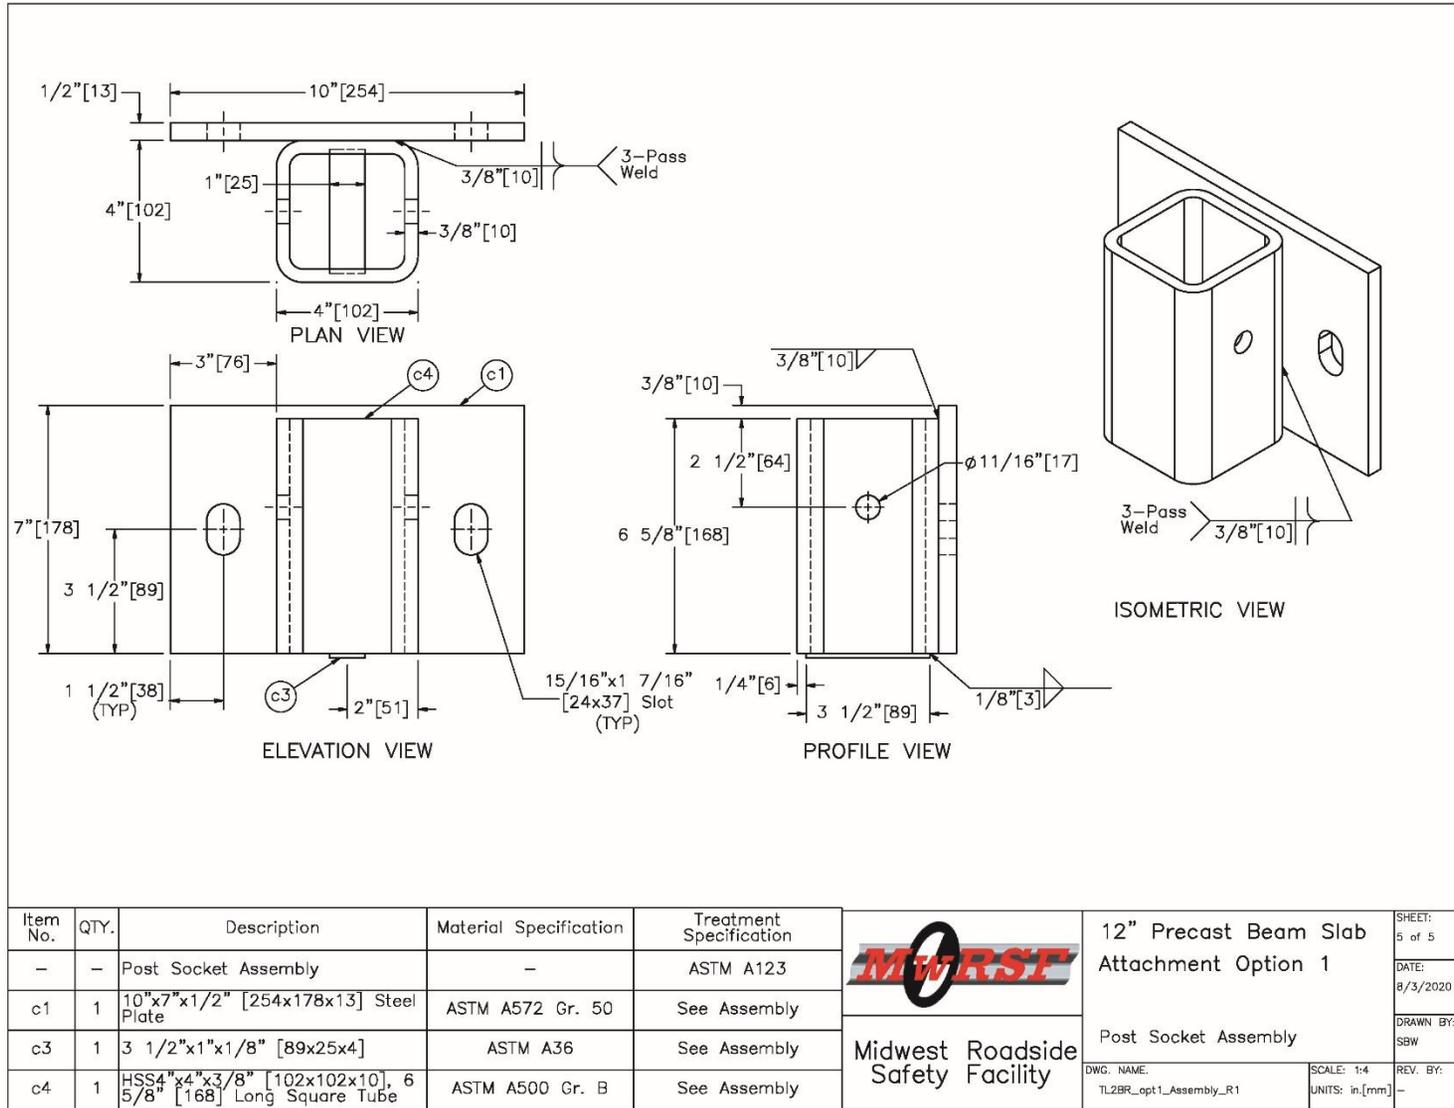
System Details, TL-2 Bridge Rail Attachment to 12-in. Deck, Option 1, Socket Assembly
